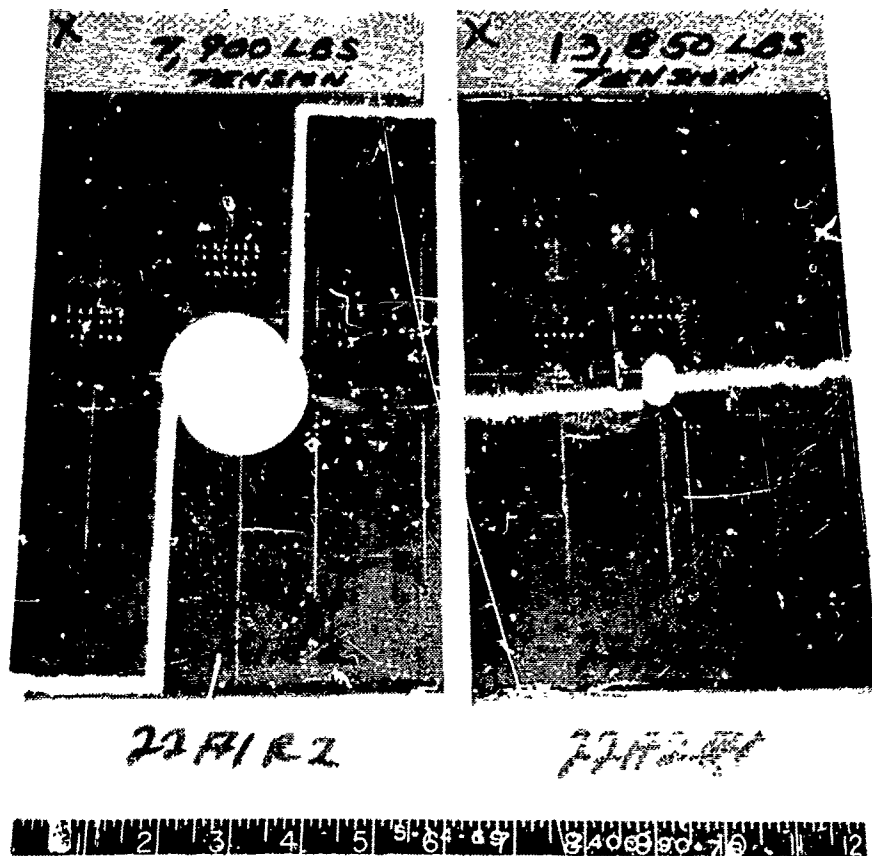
Failure Under Uniaxial Load, Specimens 22A2R1 and 22A1R2
